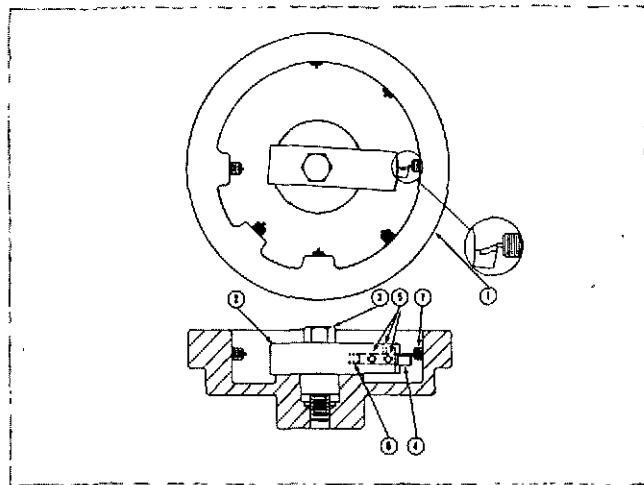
, V40154, Setting ST-1081 tool bit
